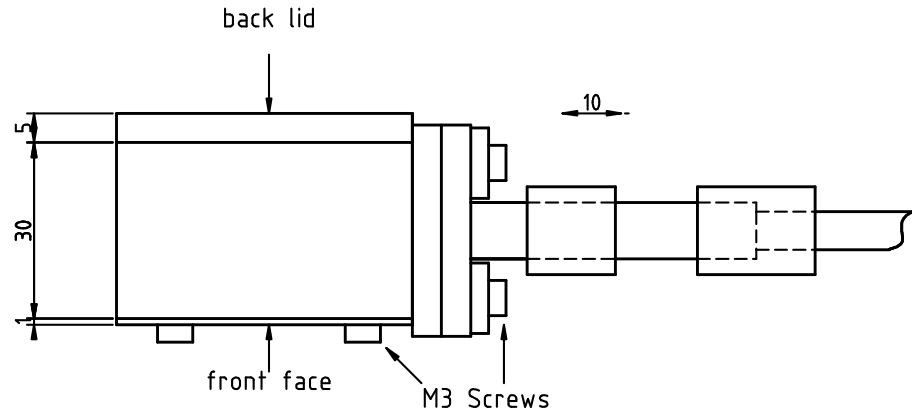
Assembled top view of the RFEA used in this thesis.
